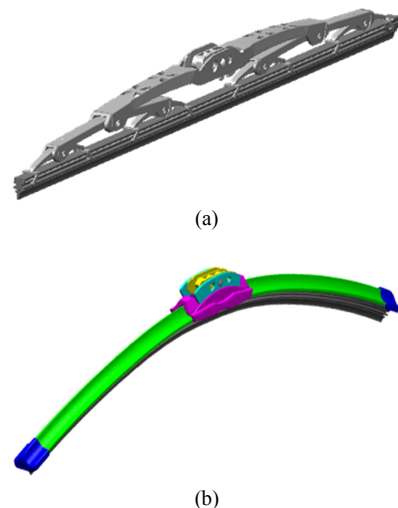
Blade assembly (a) Tournament type (b) Flat type
